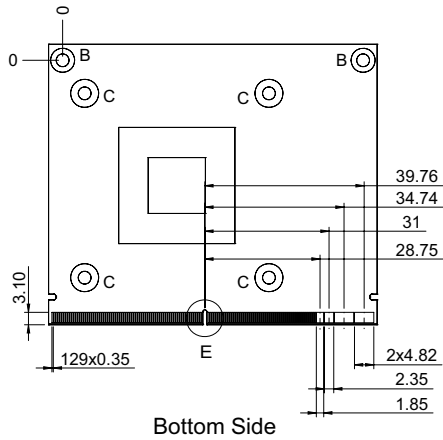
EGX-MXM-T1000 Layout - Bottom View
